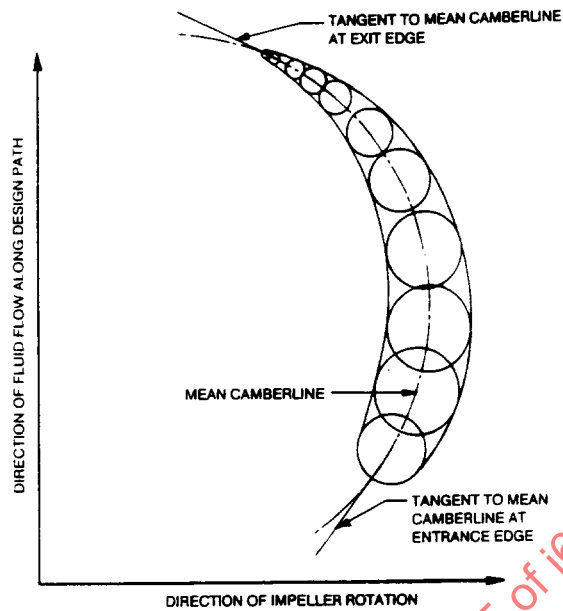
DEVELOPED SECTION OF BLADE AT INTERSECTION WITH DESIGN PATH SURFACE
